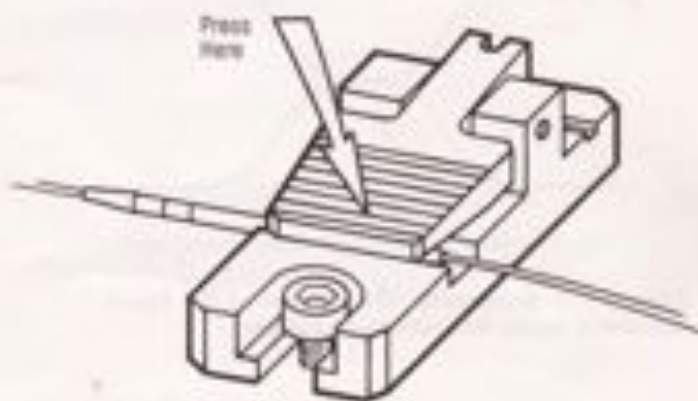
Crimping the completed splice in the crimp tool at the back of the splice fixture.
